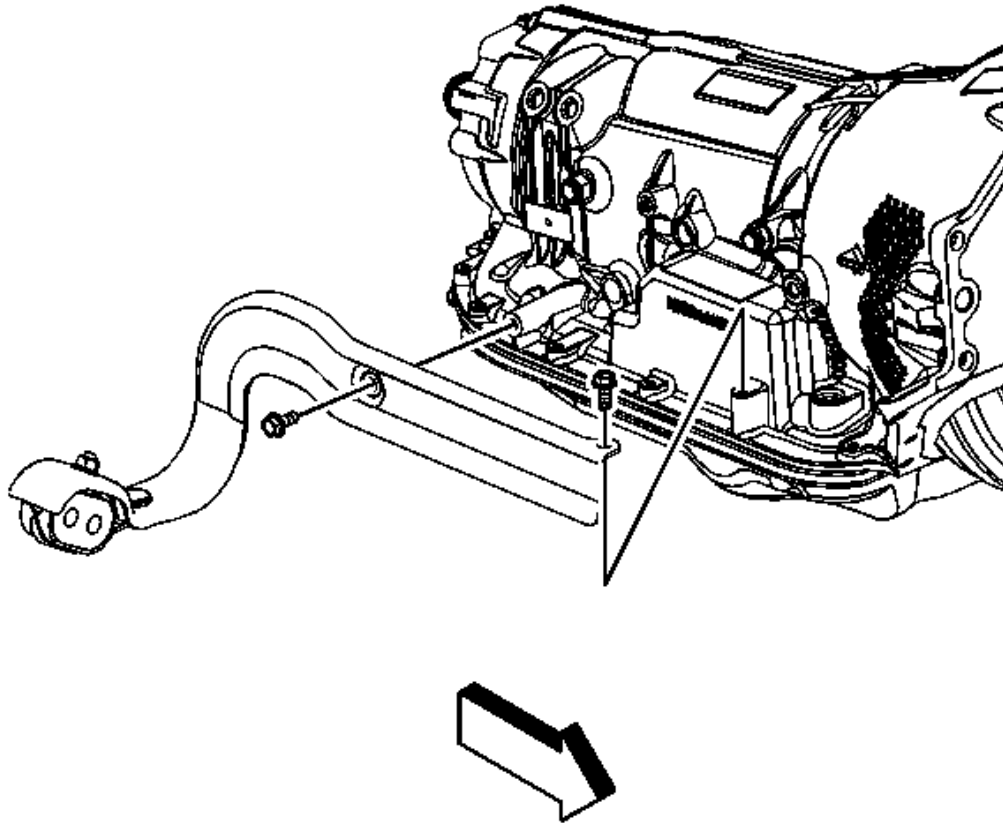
View Of Exhaust Pipe Hanger Bracket & Bolts
